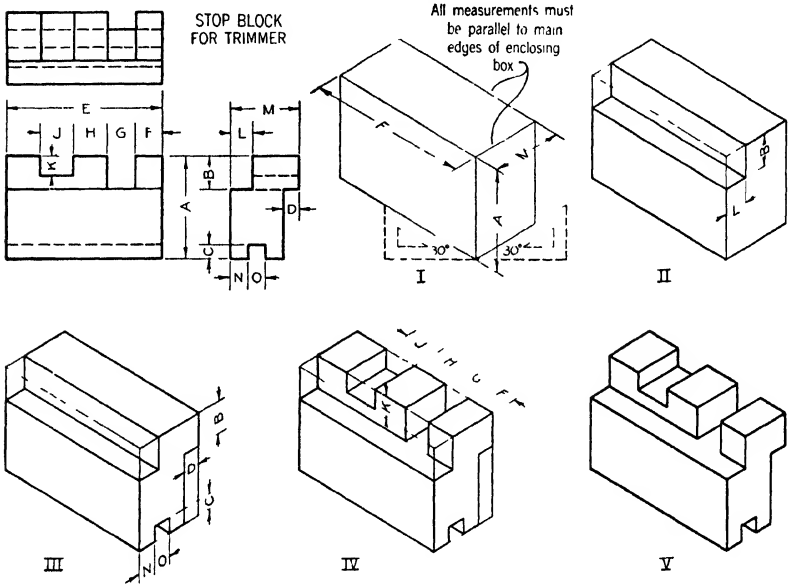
ISOMETRIC DRAWING OF NORMAL SURFACES
